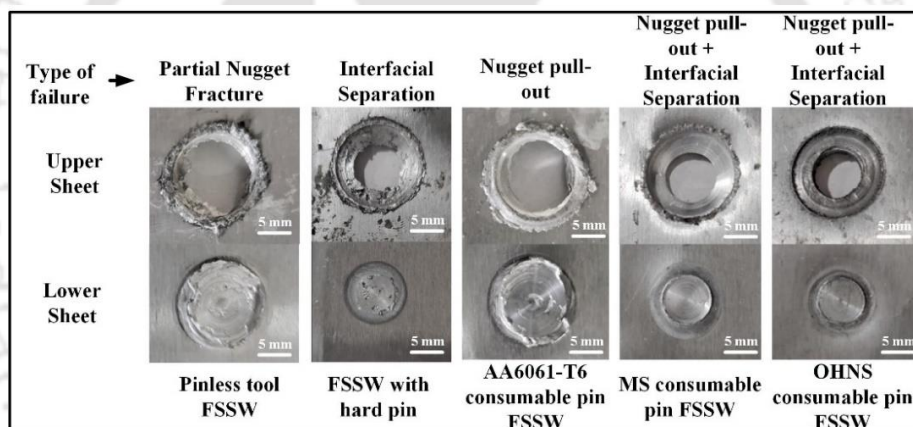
Different modes of failure in the joints produced during welding of AA6061-T6 sheets
